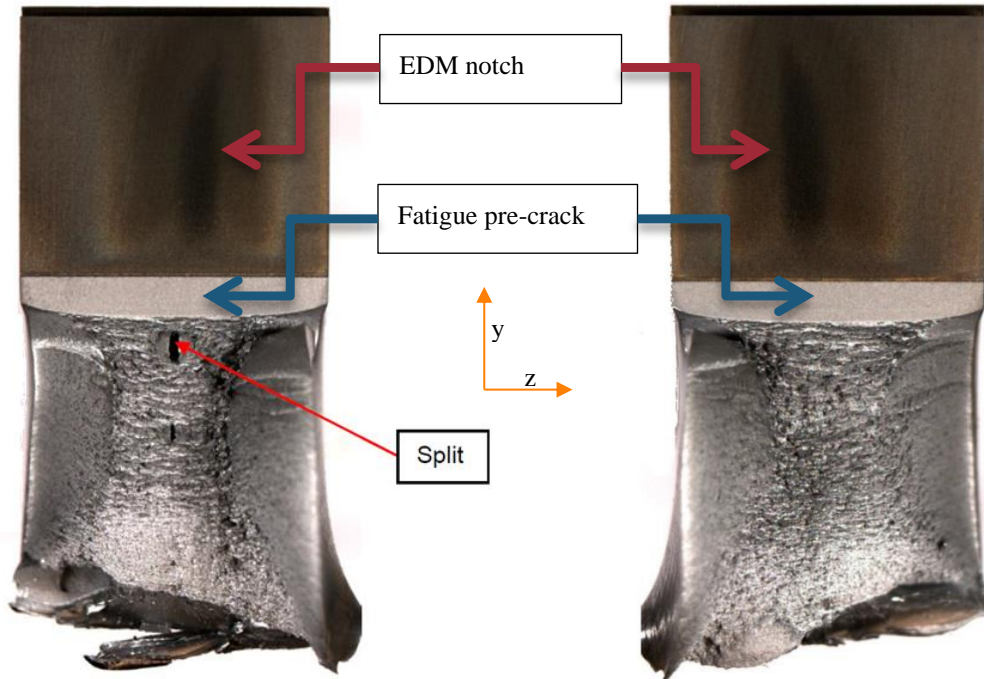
Fracture surfaces of specimen SW3AD-1 (left) and SW3AD-3 (right) with 24x48mm cross-section.
